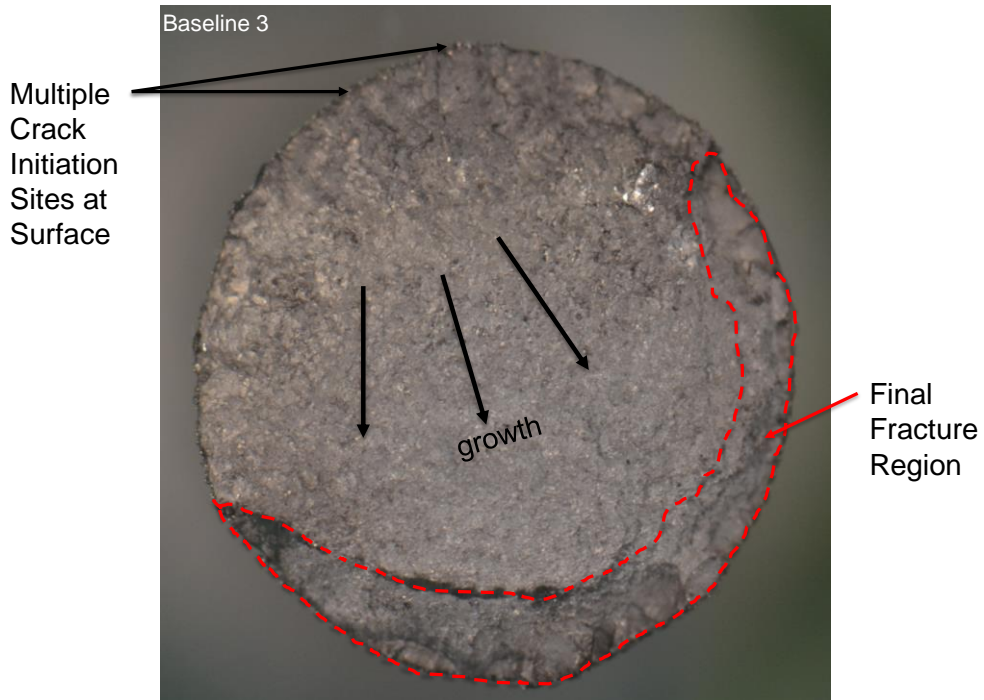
Fracture Surface Photograph of Baseline Specimen 3 ~10X Magnification
